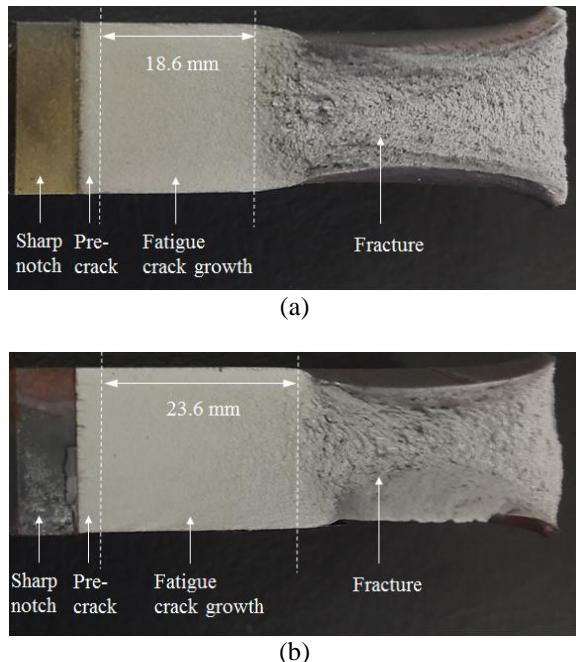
Fracture surface; (a) as-received specimen and (b) dual-phase specimen.
